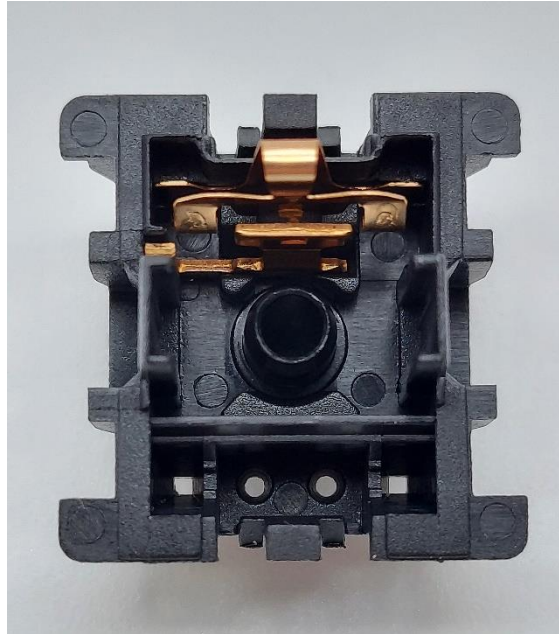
Winkeyless.KR Zeal Clear bottom housing internal shot showing mold ejector markings and general features.
